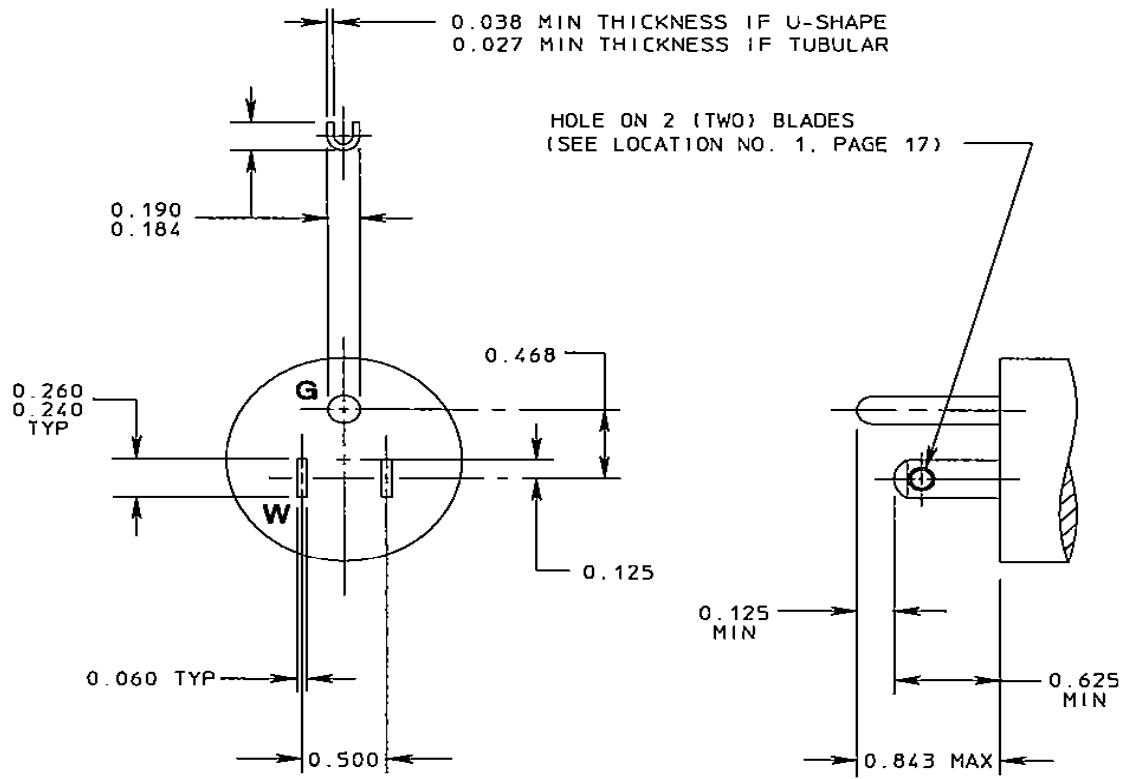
Engineering dimension drawing for grounding contact of 1302
